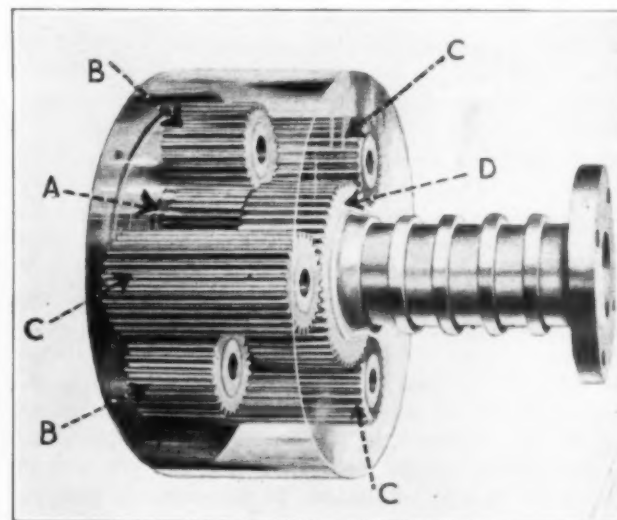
REVERSING GEAR FOR THE ATLAS IMPERIAL ENGINE COMPANY MARINE ENGINE
